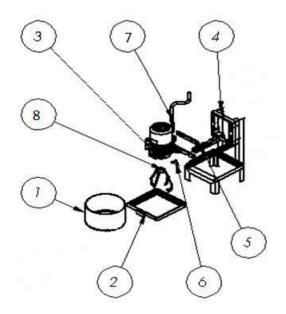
Exploded view of the dough mixer (1-mixing bowl, 2-bowl base, 3-electric motor, 4-frame, 5-slider, 6-bolt and nut, 7-torque lever, 8-Agitator)
